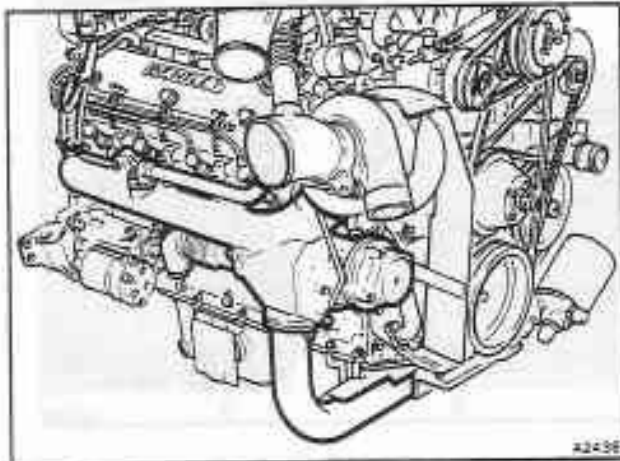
One piece exhaust manifold - 'A' bank
